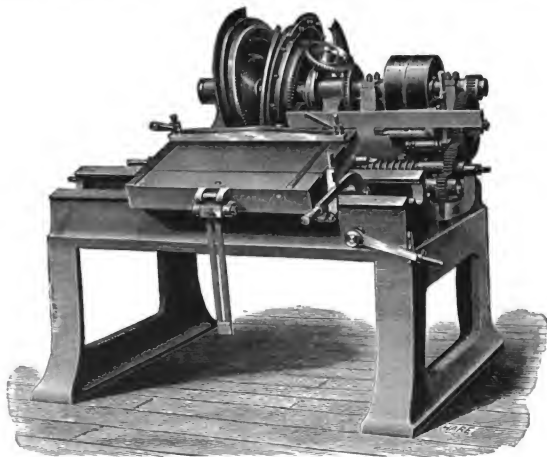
BOX-BOARD DOVETAILING MACHINE.
